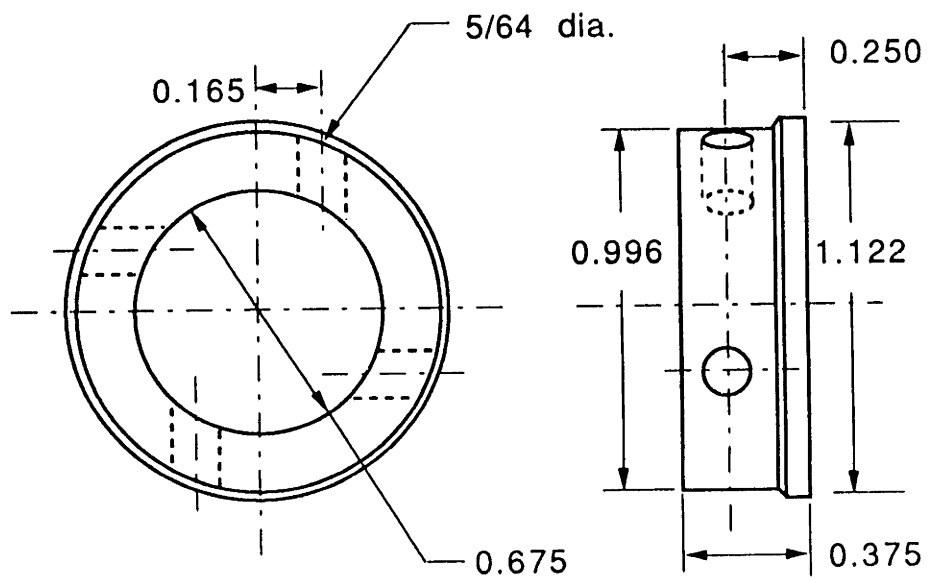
Illustration of the swirl ring used in the Miller torch for the experiments represented in this section.
